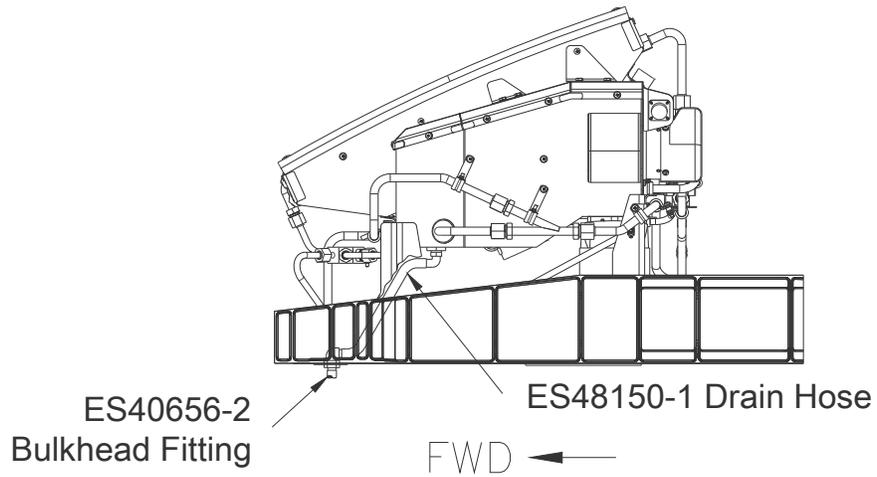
View of Left Aft Evaporator Assy Looking Inboard from LH Side
